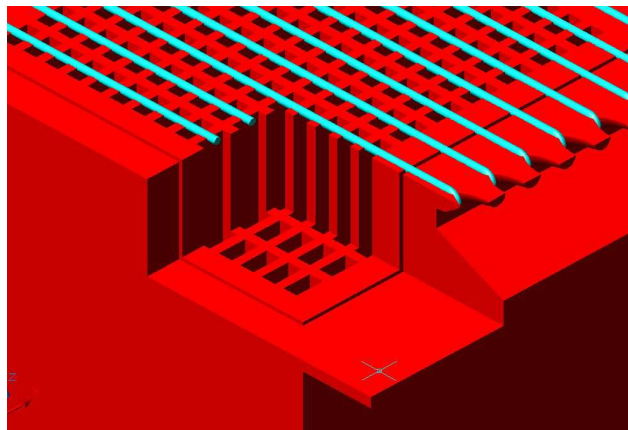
Detail of the hot wire arrangement on the sensor frame
